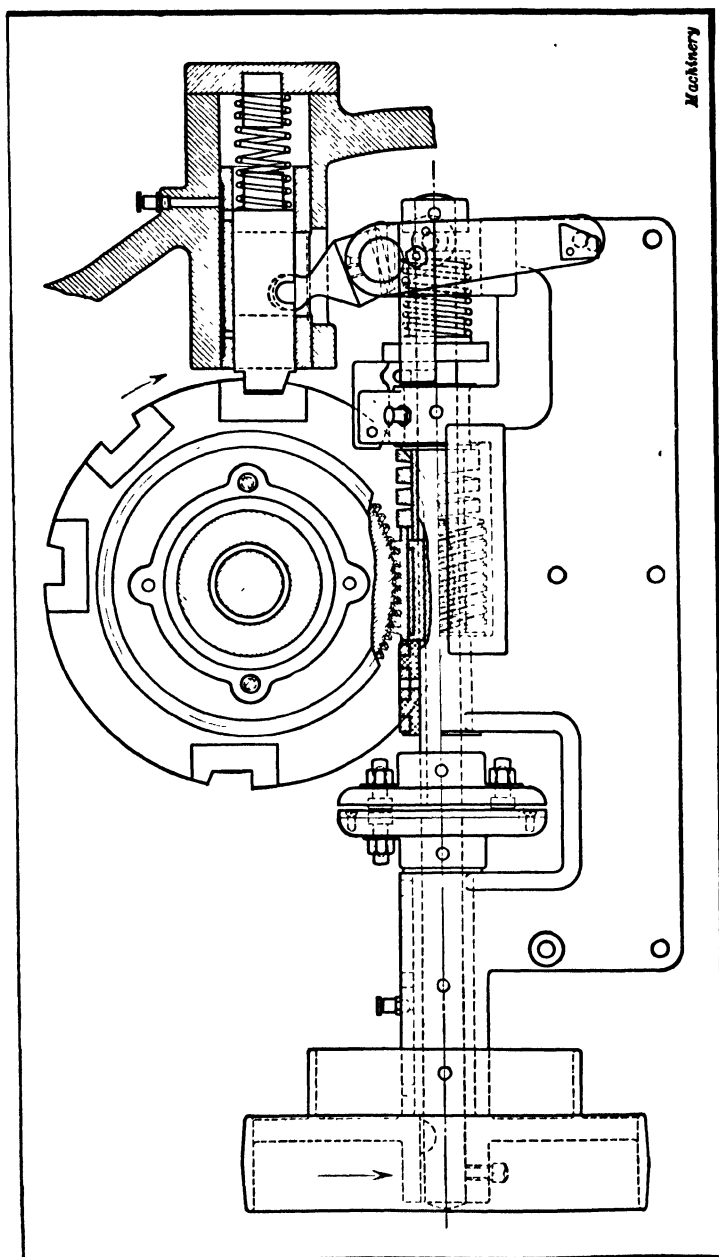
Example illustrating how Sectional Views of Important Details are shown on Some Drawings
